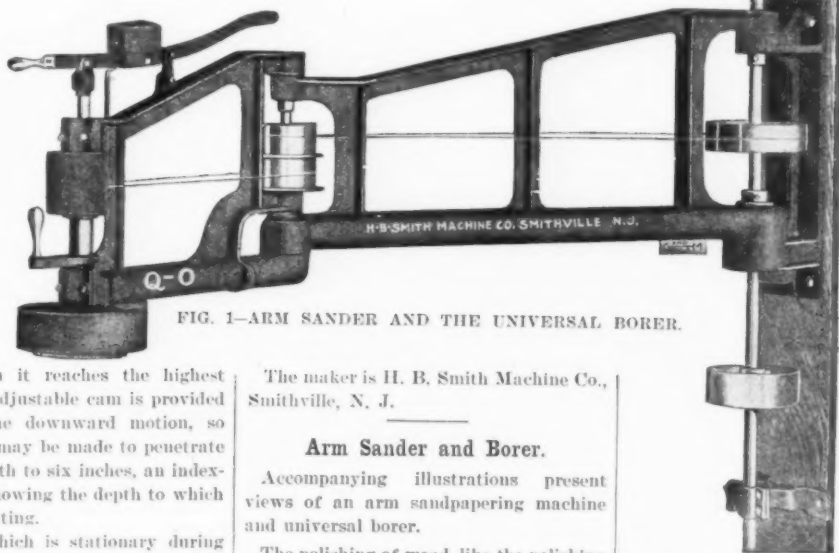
ARM SANDER AND THE UNIVERSAL BORER.
